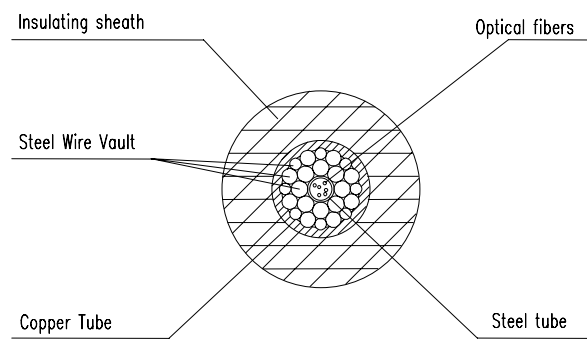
Typical deepwater cable cross section showing the internal hydrogen barriers and steel vault.
